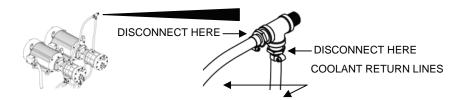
HP Pump Coolant Return Tubes at the RO Feed Tank.
